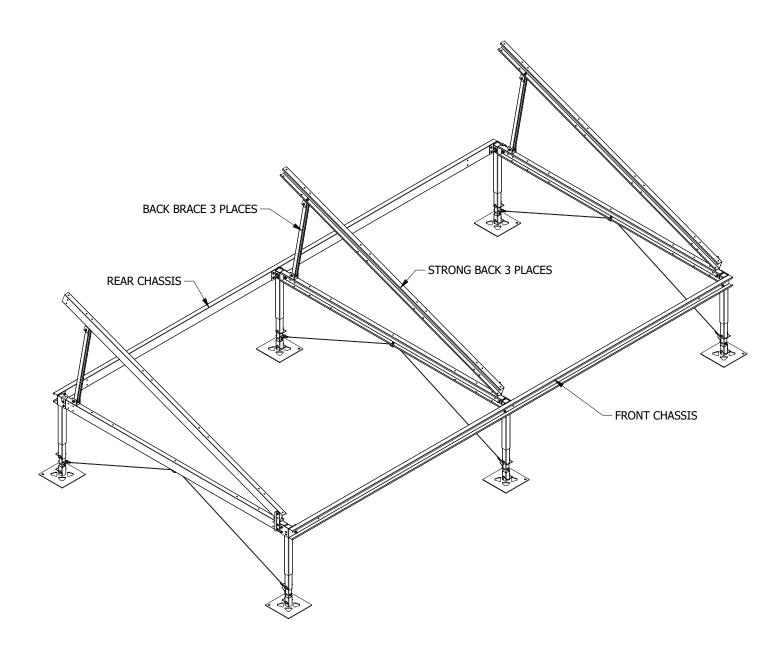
Strong Backs and Back Braces [STD Version shown above]
